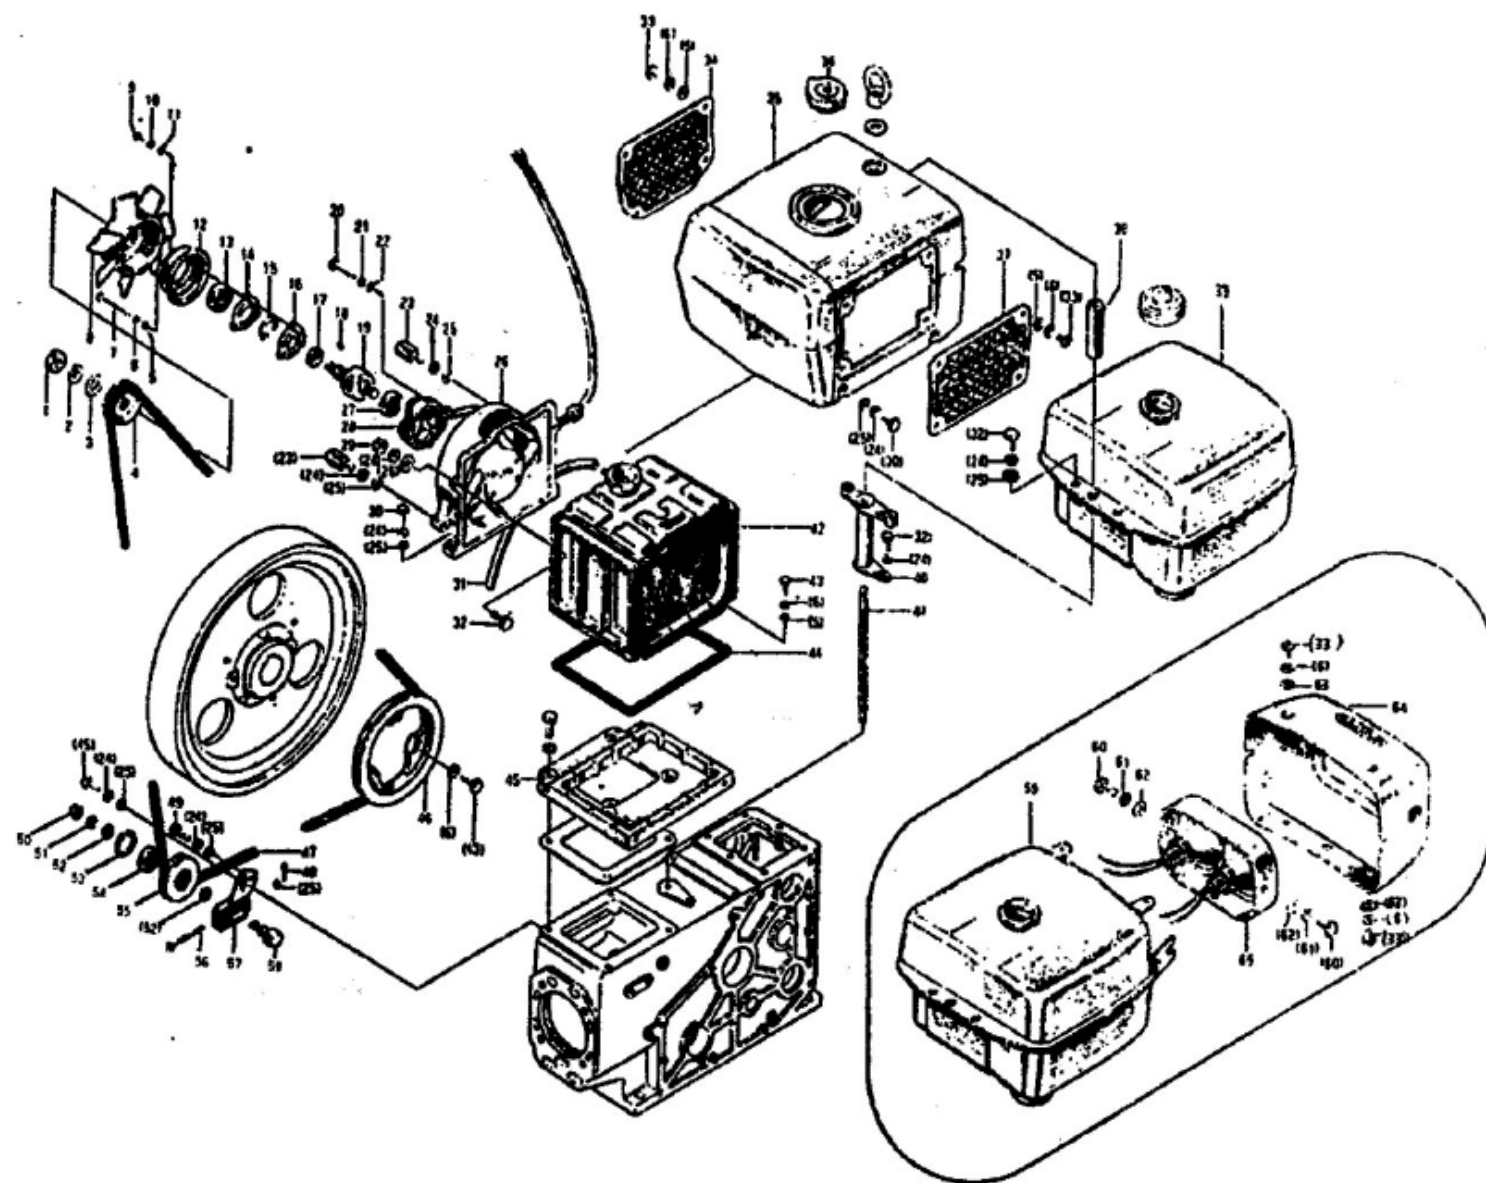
Special Parts for Model S195N/S1100N Diesel Engine
